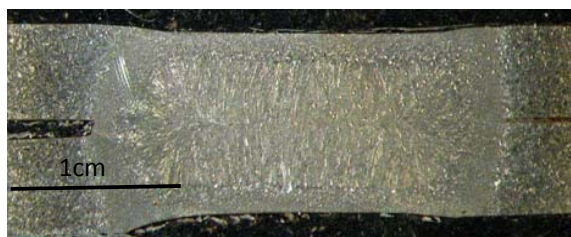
Macro-structure of welding sample of similar junction M/M
